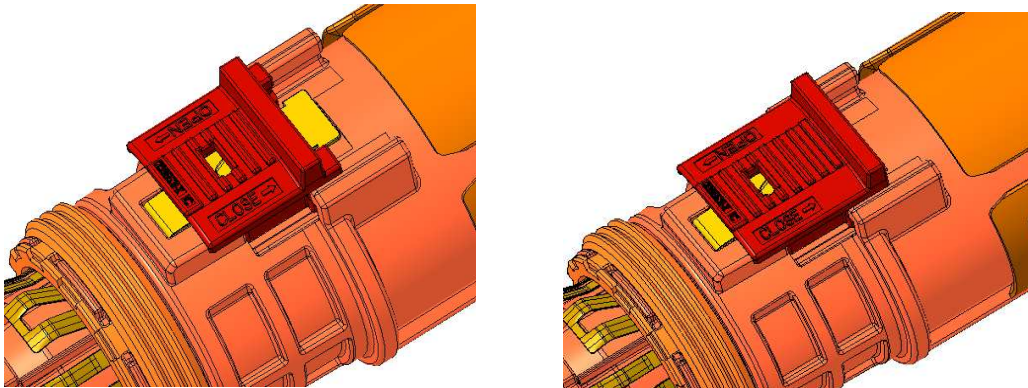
Delivery condition – CPA in pre-lock position (Tool access and Finger access)
